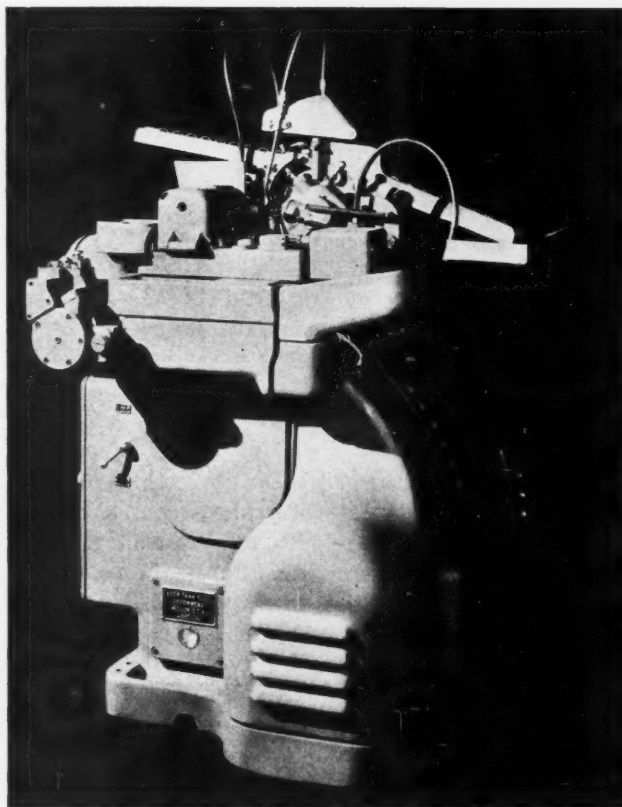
The Centerless Internal Grinding Machine from One End, Showing the Arrangement of the Loading and Unloading Chutes and the Design of the Guards that Enclose the Main Motor, Pumps, and Driving Belts
